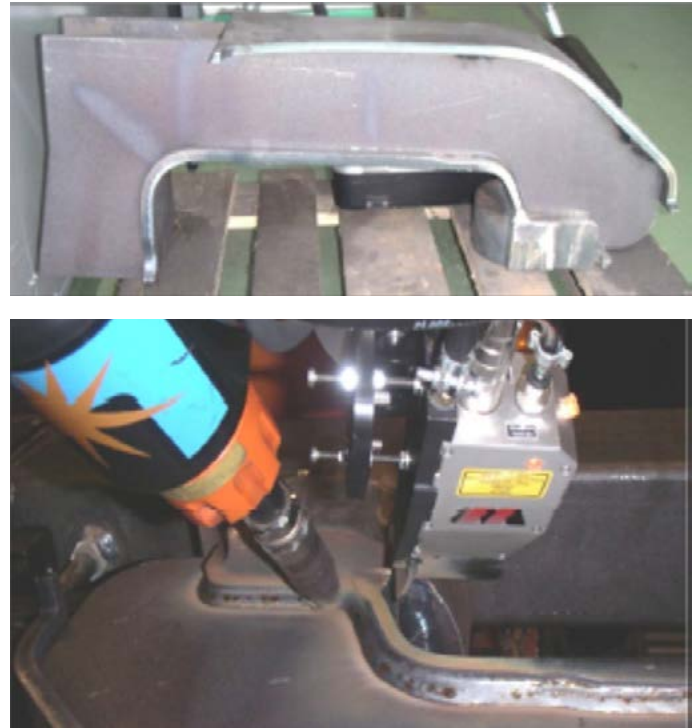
Test structural element and the hybrid welding head with the sensor
